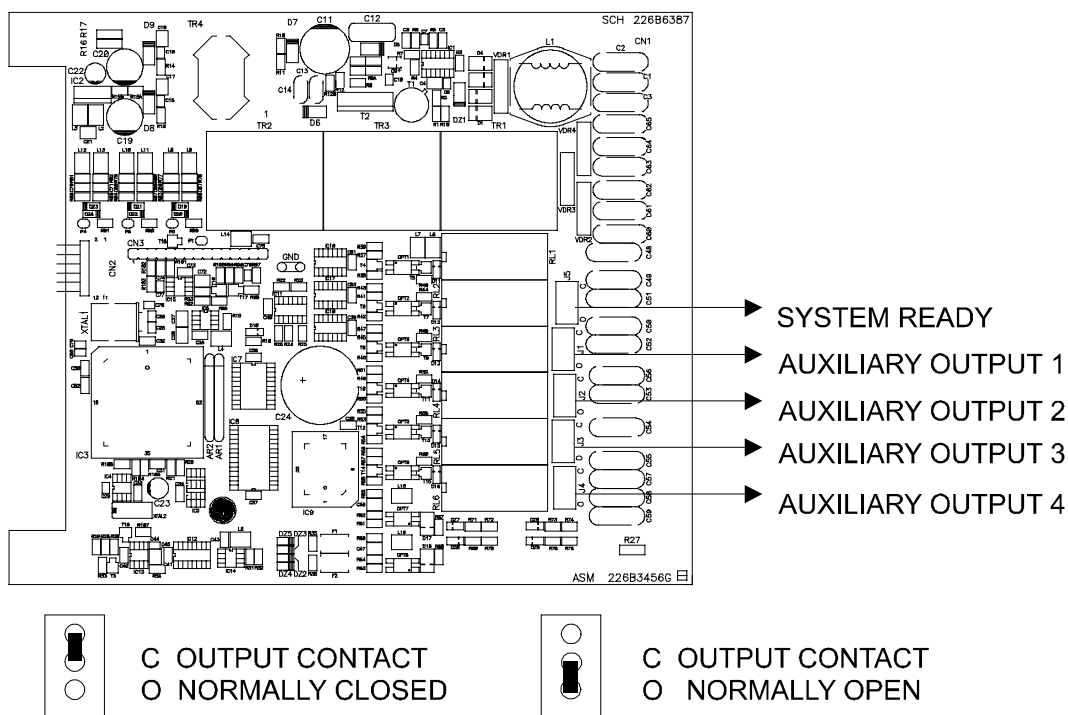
PCB SCHEME SHOWING THE JUMPERS TO CONFIGURE THE OUTPUT CONTACTS (NC / NO)
